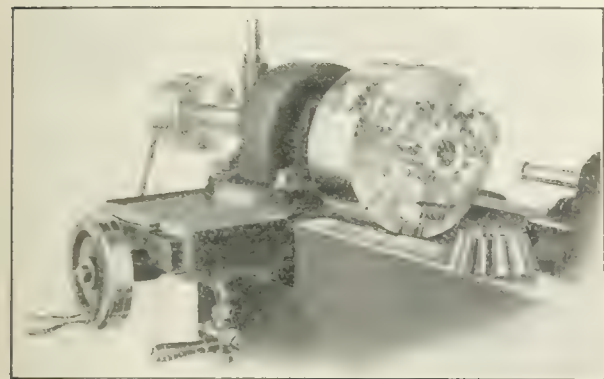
The Special Arrangement of Chuck Jaws for Holding Bevel Pinions.
